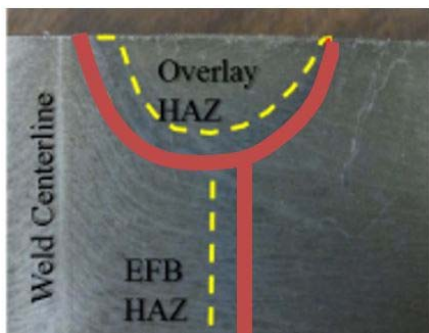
Right Quadrant of a Treated EFB Weld Cross Section after First Installation Attempt
